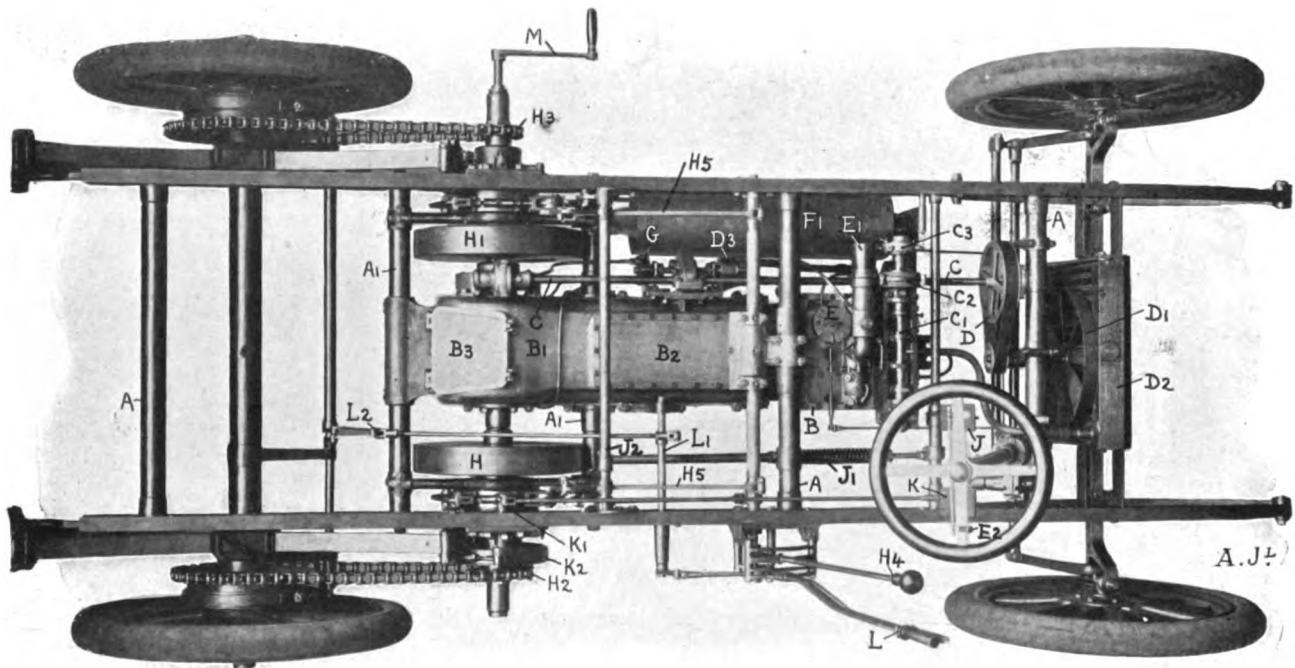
View of the 12-h.p. Singer Chassis, from above.
